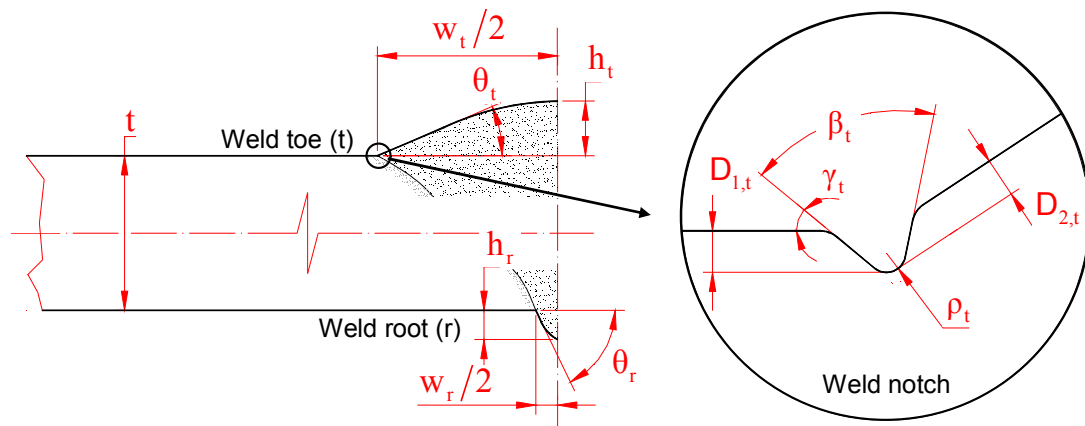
Dimensions of the weld and weld notch: weld width w , weld height h , weld flank angle θ , notch depth D , notch flank angle γ , notch opening angle β , and notch root radius ρ .
